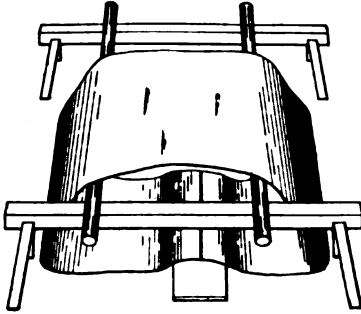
Side and End Sheet of Lead Propped Up to Enable Seam to be Set and Soldered.
